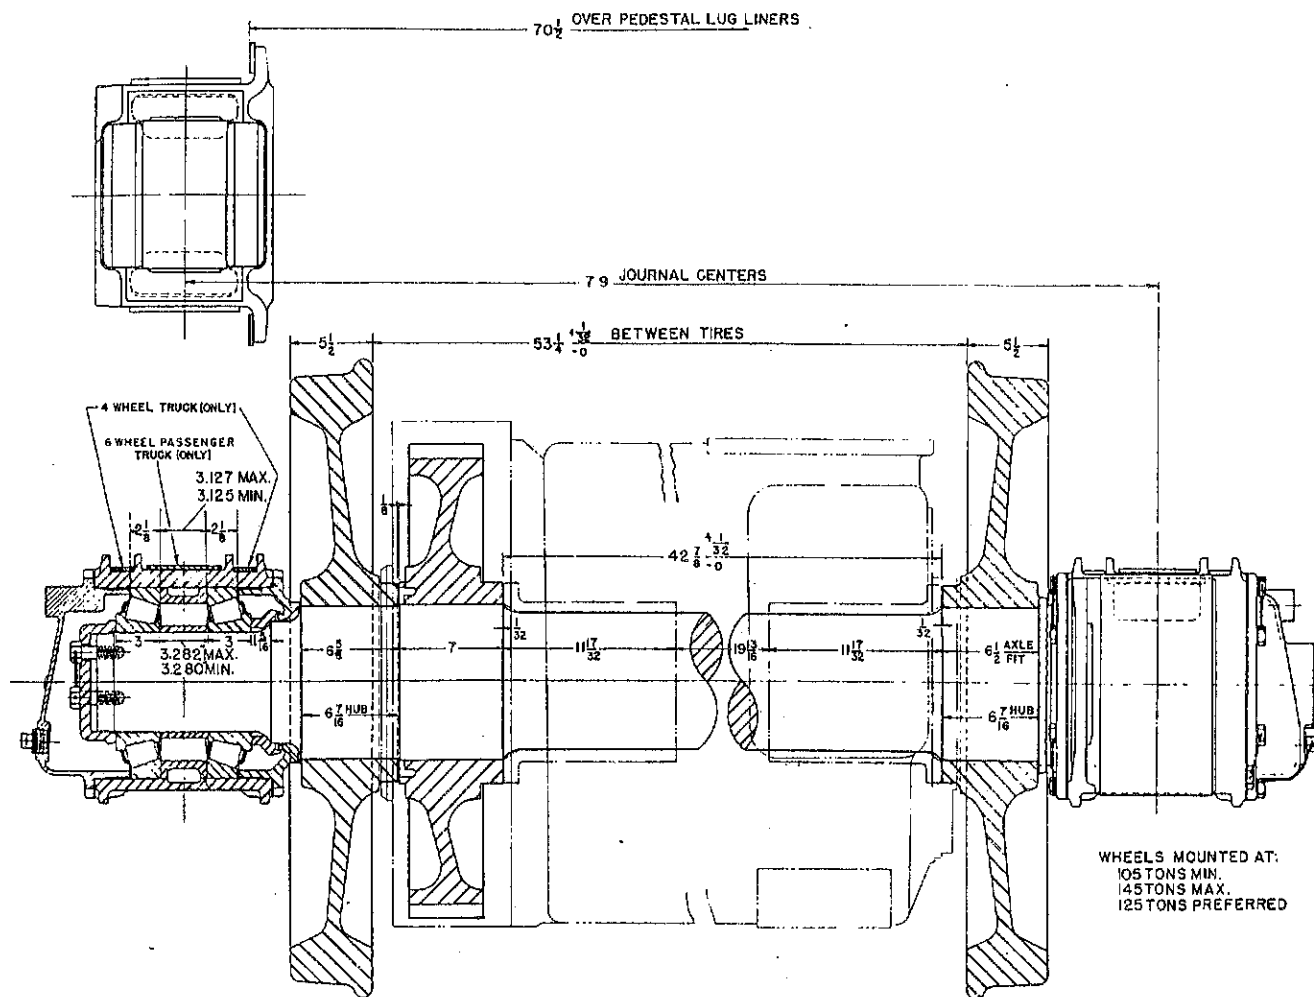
WHEEL, AXLE AND BOX ASSEMBLY
